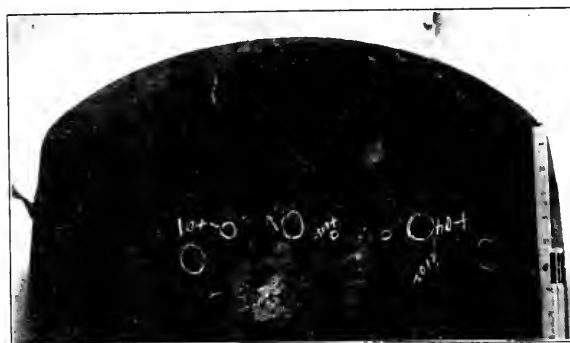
HEAD OF TANK NO. 5 BULGED AFTER TEST. ORIGINAL RADIUS 35 IN., FINAL RADIUS 19 IN.
